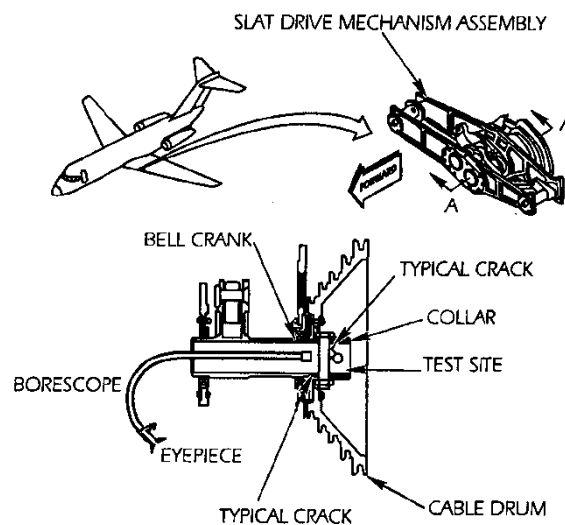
Flexible borescope inspection of the slat drive bell crank.
